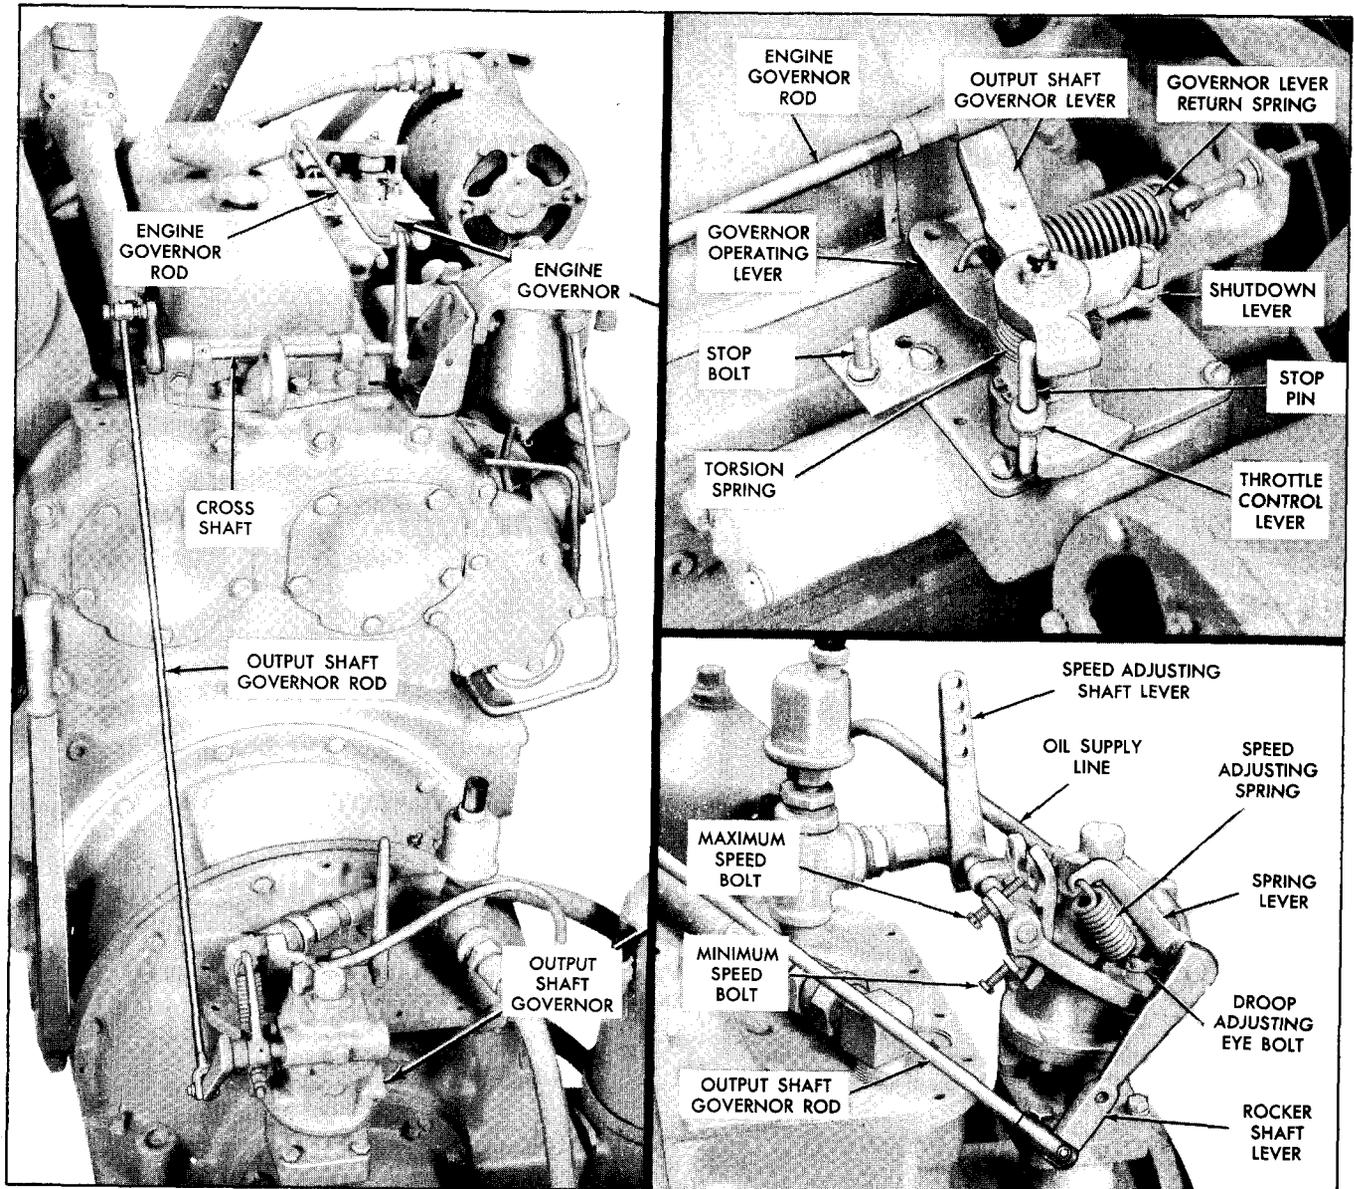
Gear Driven Output Shaft Governor and Linkage
